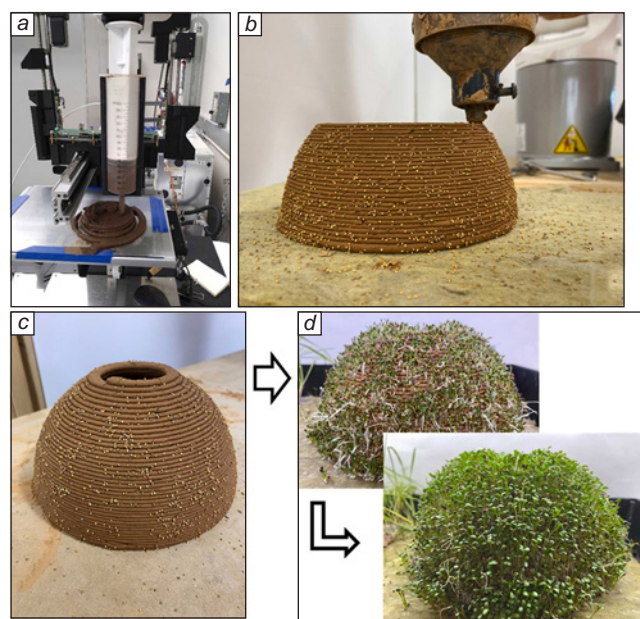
(a) Soil paste extrusion process using a Hyrel 3D Engine SR printer; (b) printing using a Potterbot extruder attached to a Kuka robotic arm; (c) example of a printed soil structure; (d) stages of clover growth on a 3D-printed soil structure.²⁴⁸ © Elsevier B.V., 2022.
